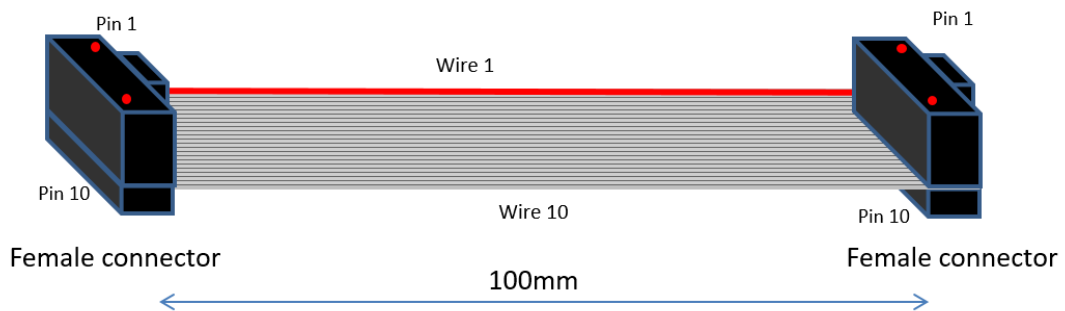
Flat cable drawing B – Breakout Board shipped with a Base Board
